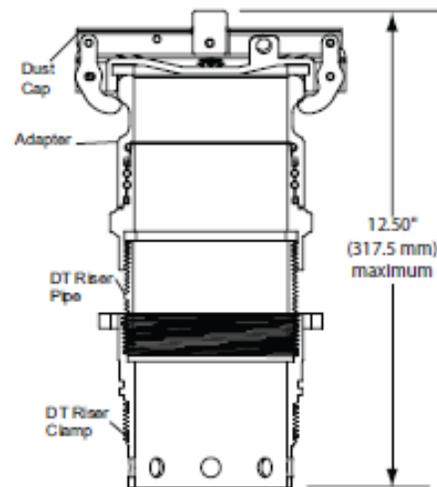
Drop Tube (DT) Riser Clamp Assembly Dimensions
